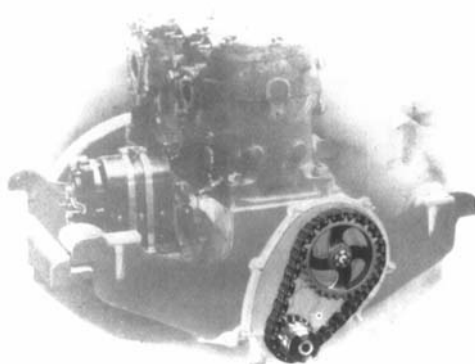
Knight-Daimler Petrol Engine. Mainshaft connected to the Eccentric Shaft operating the Internal Sleeve Valves by a Noiseless Drive Chain.
